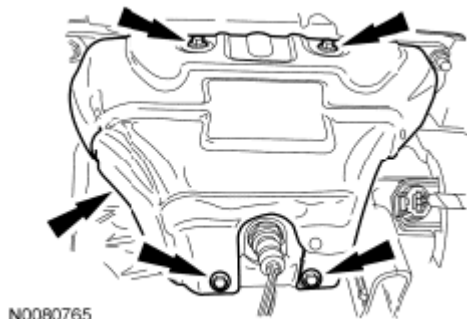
Locating Exhaust Manifold Heat Shield & Bolts
